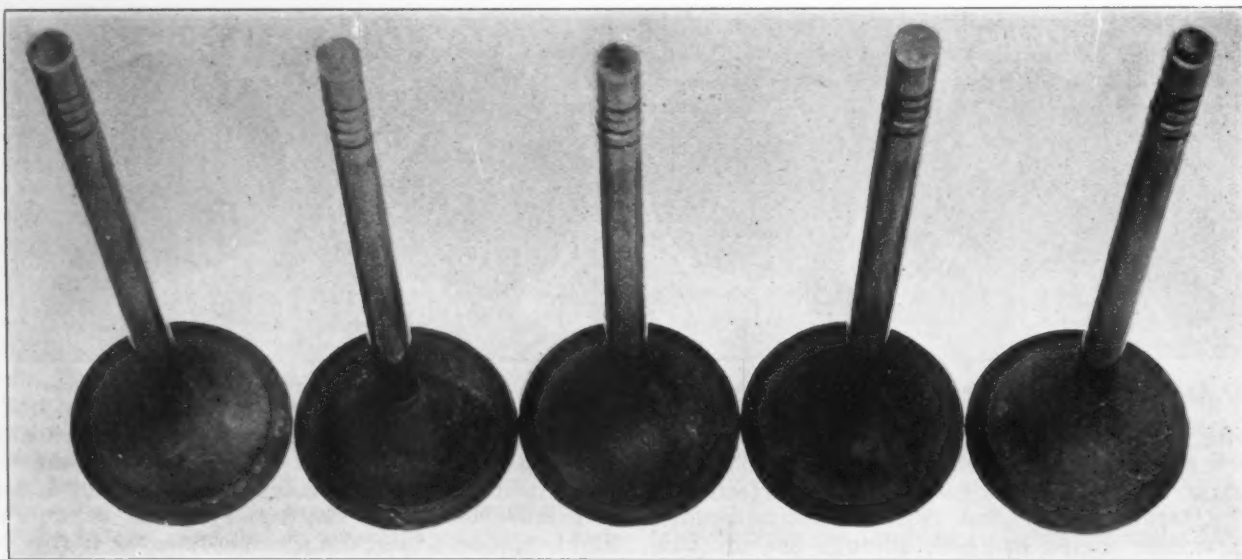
VALVES OF THE SAME ENGINE, FROM WHICH THE BUSHINGS SHOWN IN FIG. 9 WERE TAKEN, AFTER IT HAD BEEN SUBJECTED TO A 50-HR. TEST WITH A MODIFIED VALVE-GEAR
